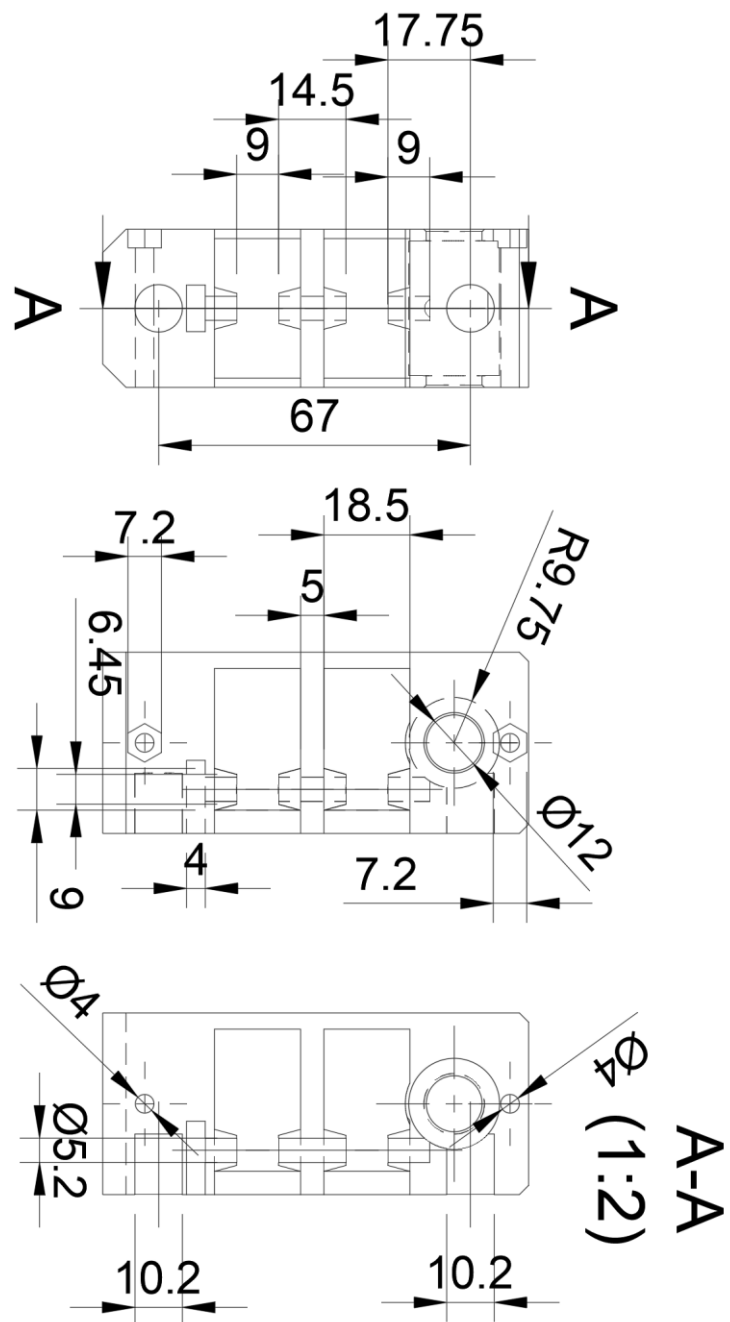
shows the dimensions and the section dimensions of the gantry.
